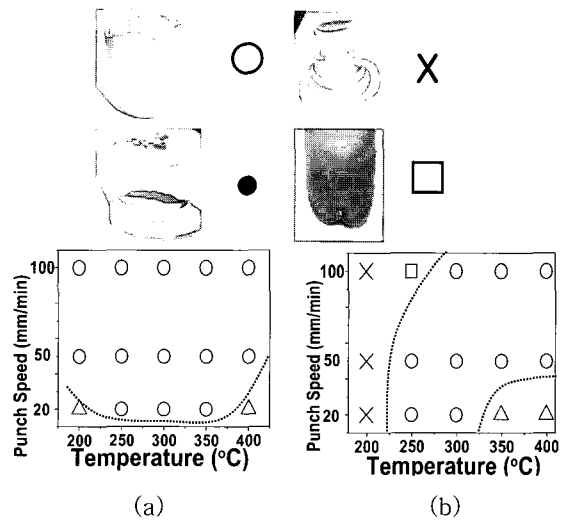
Relations of defect analysis (a) 0.8mm blank and (b) 1.4mm blank after the deep drawing process
